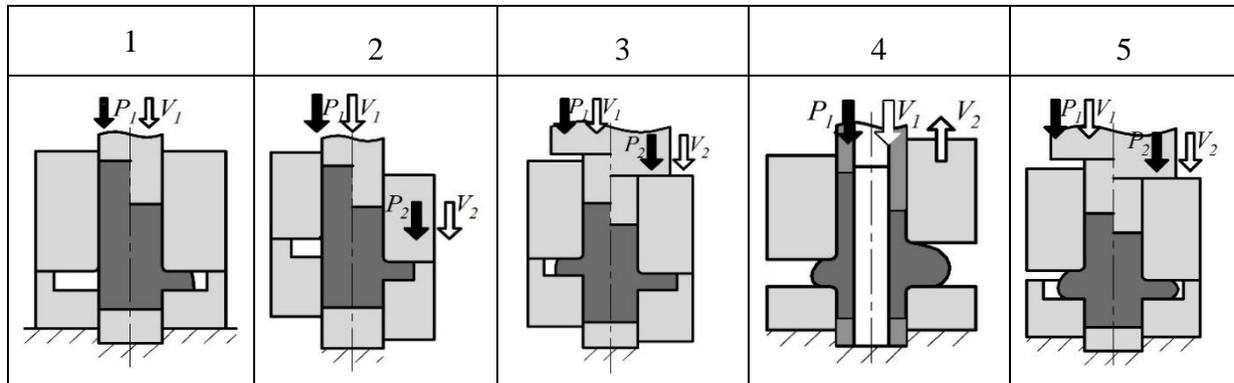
Methods of adjusting the kinematics of metal flow during extrusion
